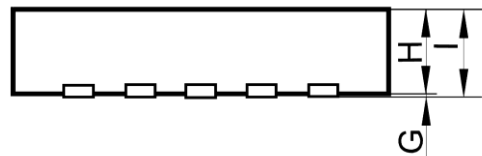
DFN-10 Package dimensions (bottom). Note that the saddle need to be connected to GND on the PCB.
